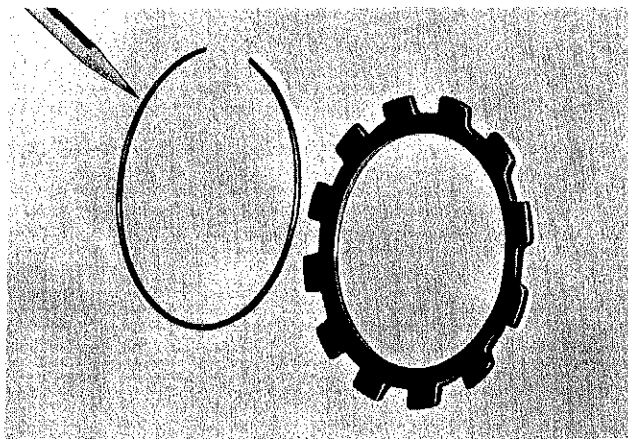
Wear on the clutch friction disc and the retaining ring must be checked carefully. The diameter of the retaining ring is important to operation because a loose ring could result in clutch slippage.
